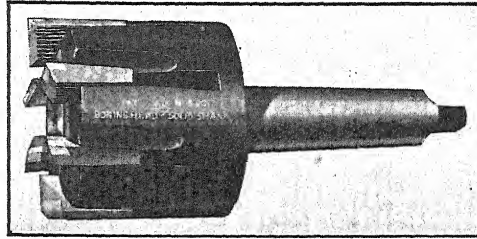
The O.K. Tool Co. Series 700 Inserted-Blade Adjustable Boring Head with Integral Taper Shank.
